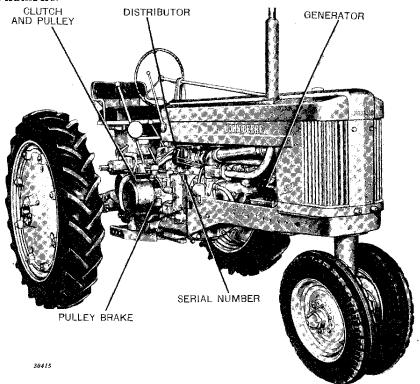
John Deere Model "50" Tractor-Pulley Side
